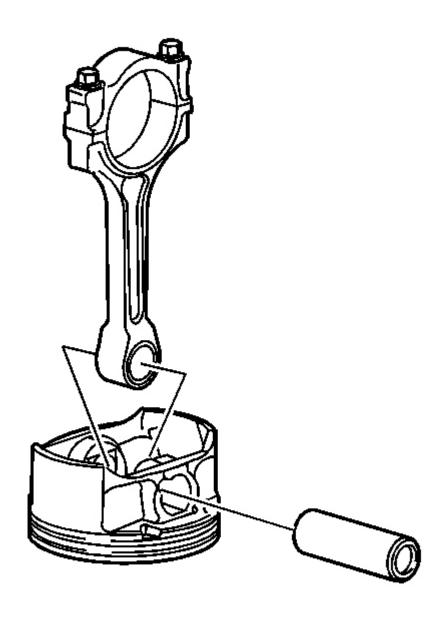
View Of Piston Pin & Connecting Rod Courtesy of GENERAL MOTORS CORP.
